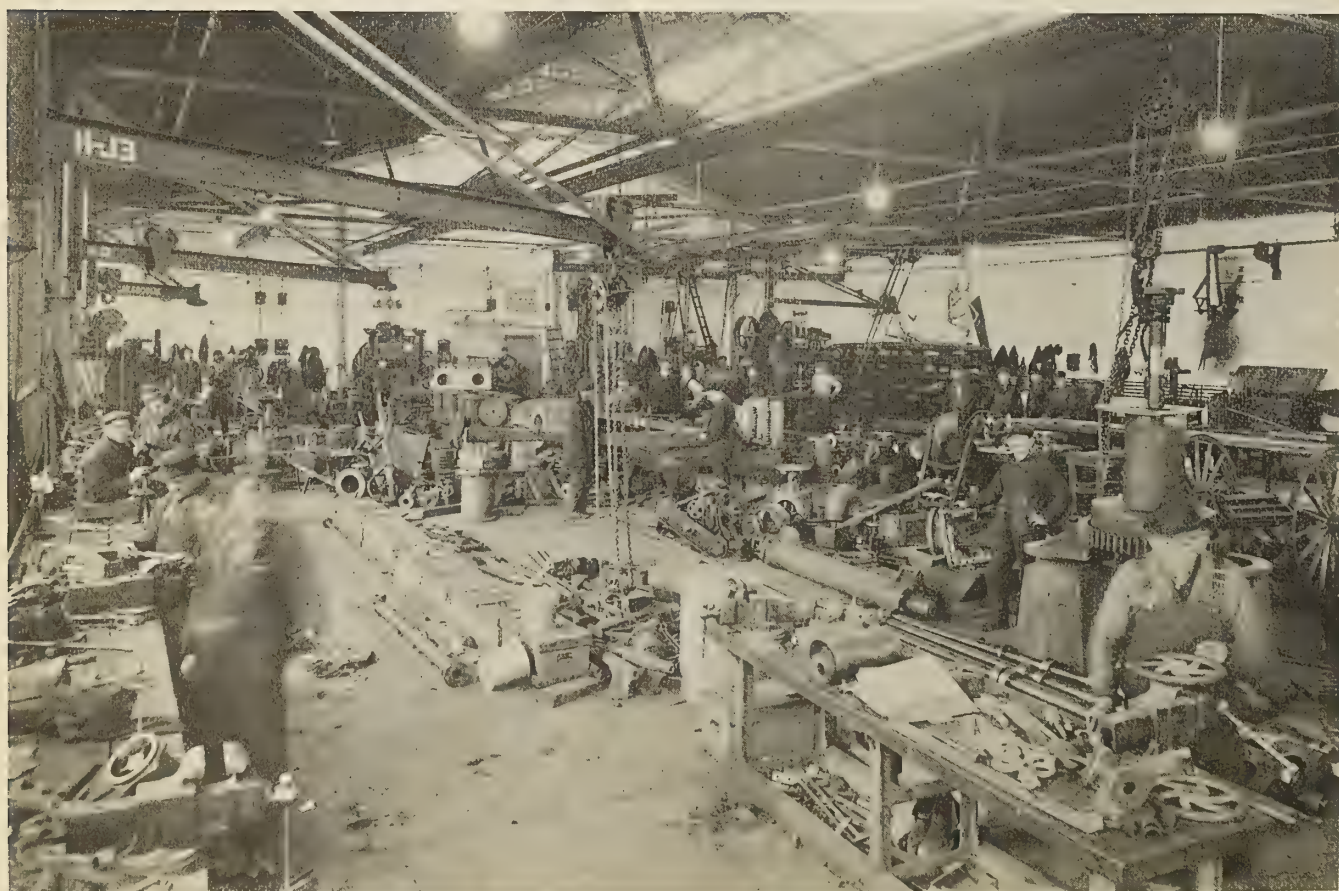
Interior View of Outfitting Machine Shop, Adjoining General Stores Building
